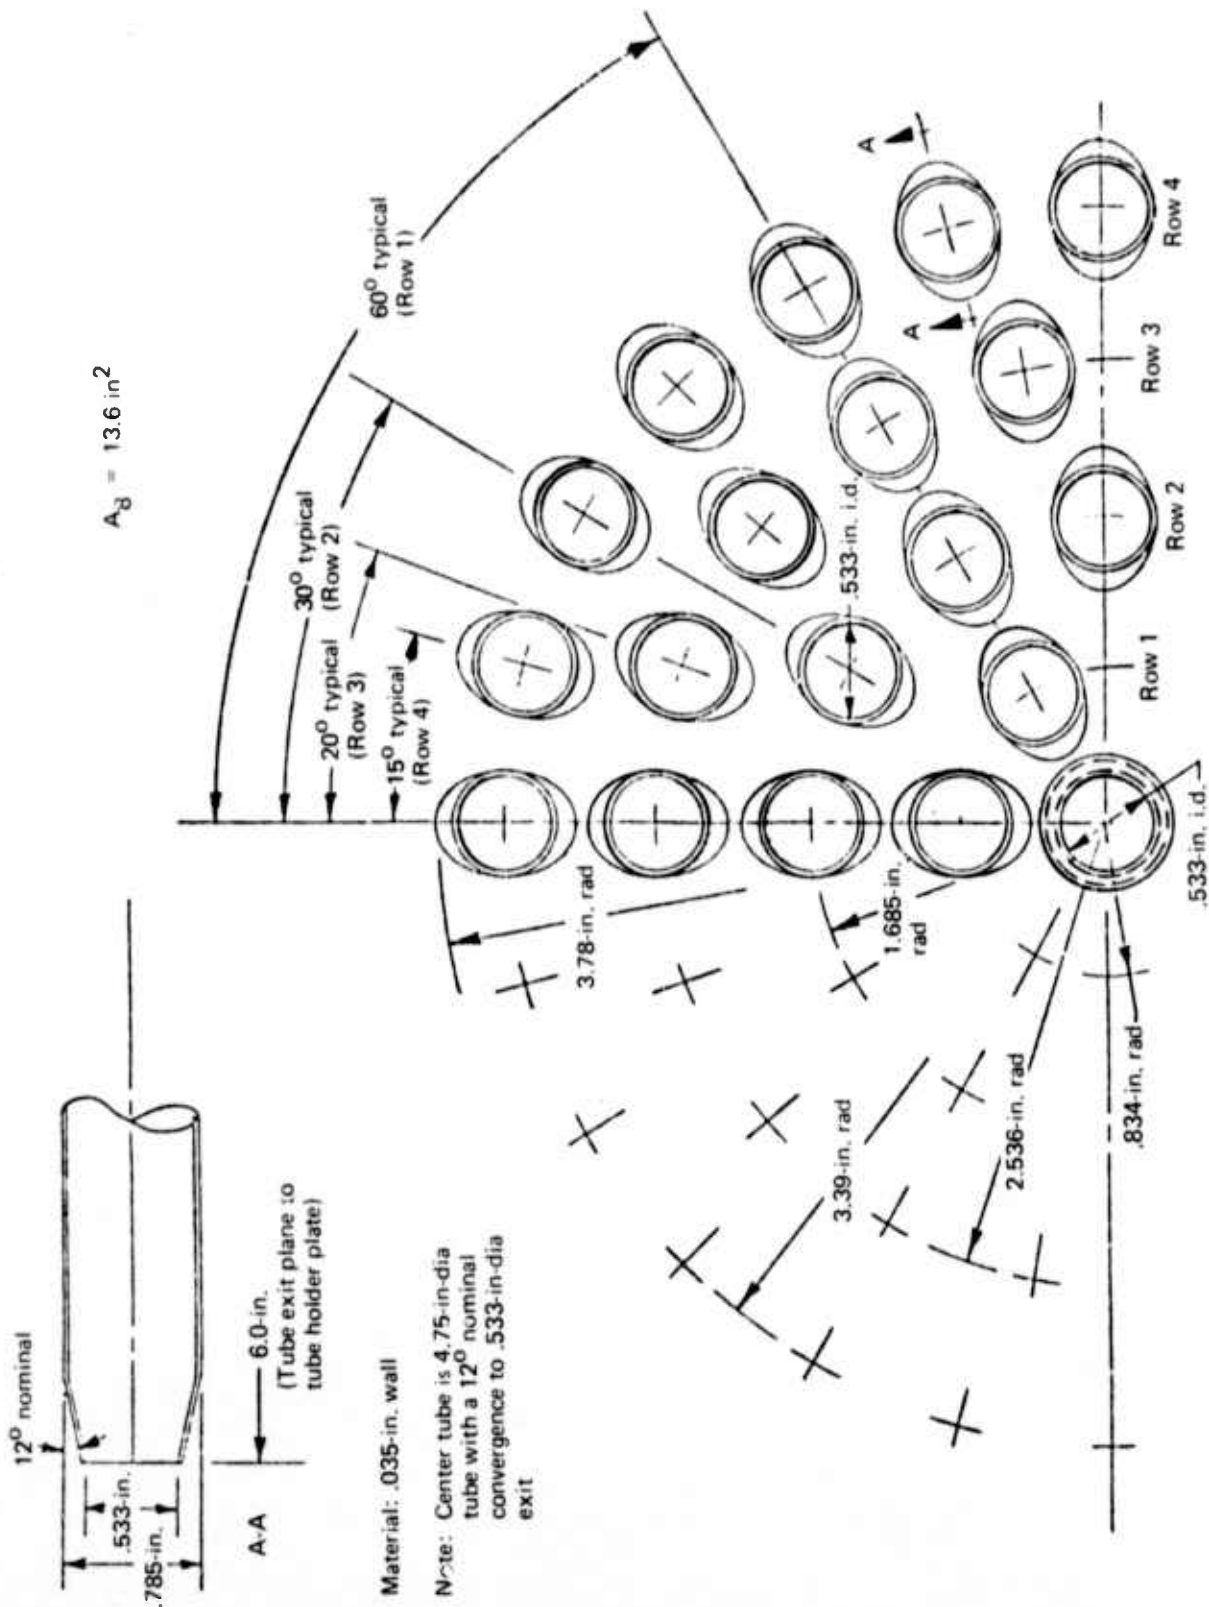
Schematic of 61-Tube, AR 3.3 Elliptical-Tube Close-Array Nozzle
